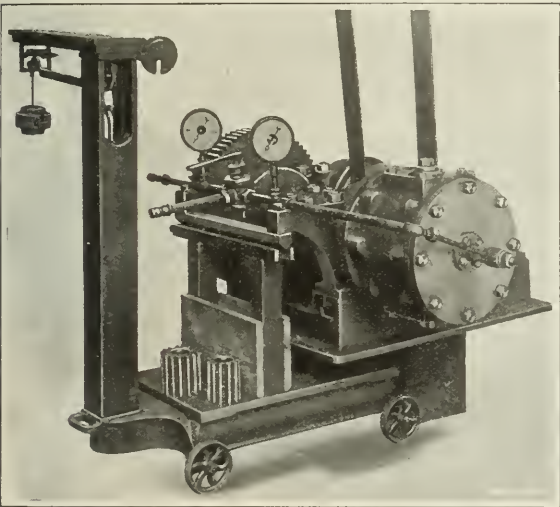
Opposite Side of Gear Testing Machine shown in Fig. 1
